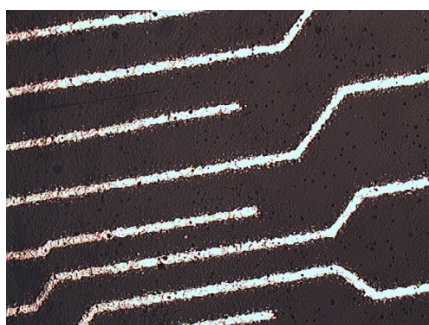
Silver metal pattern printed using the ultrasonic atomizer
